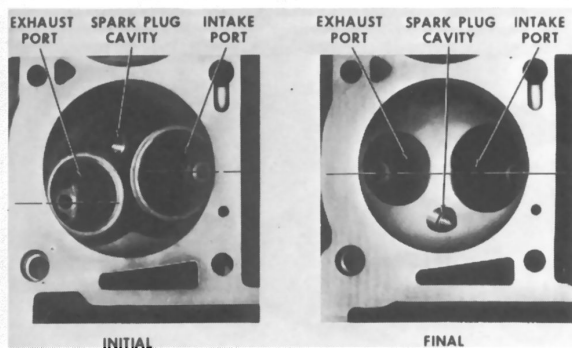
Combustion chamber designs, SOHC cylinder head
